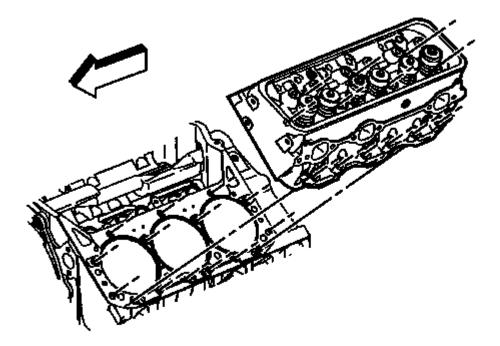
Removing/Installing Cylinder Head (Left) Courtesy of GENERAL MOTORS CORP.
